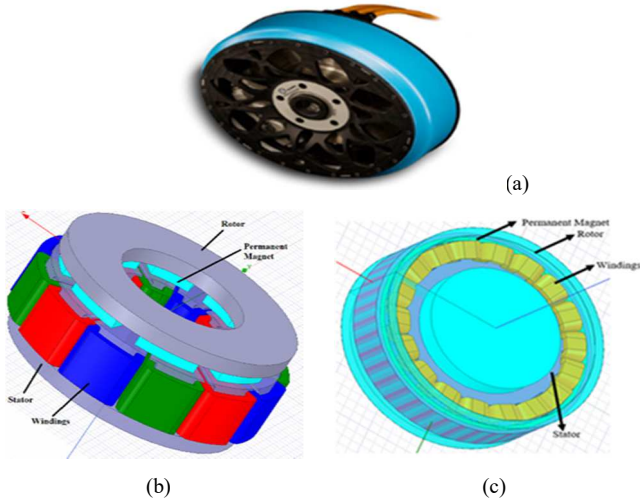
In-wheel motor scheme (a), axial type motor (b), hub motor (c).
